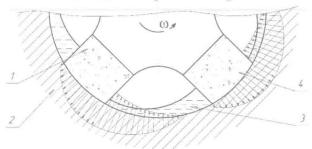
The scheme of heat transfer between the abrasive segments, the workpiece and the cutting fluid
